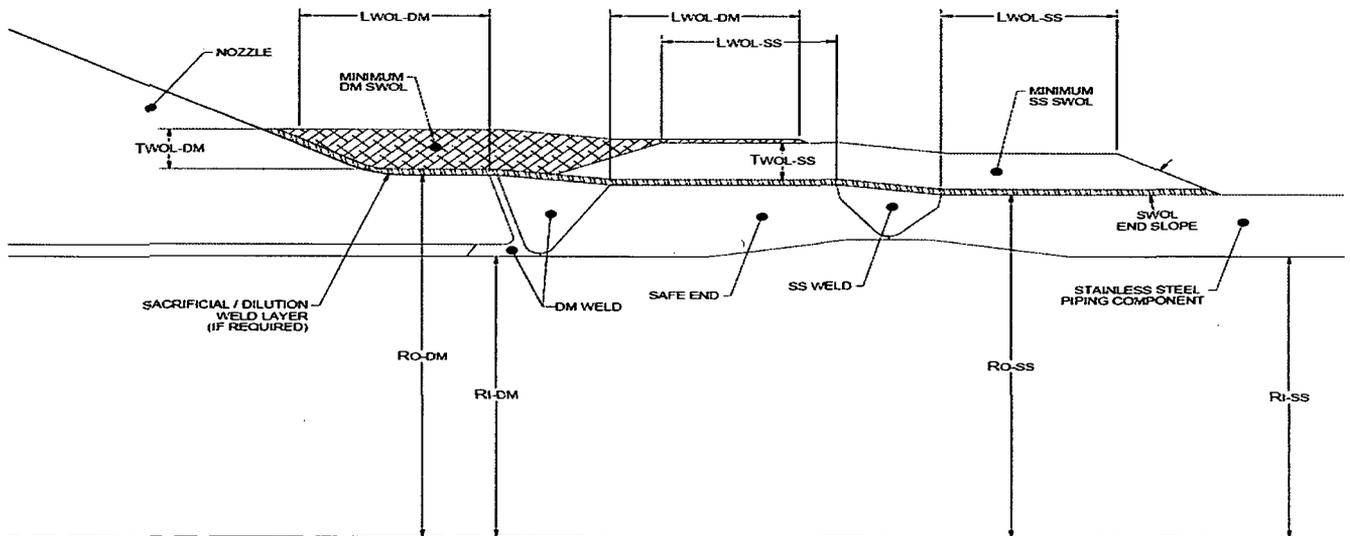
Weld Overlay Design Parameters for the Shutdown Cooling Nozzle
